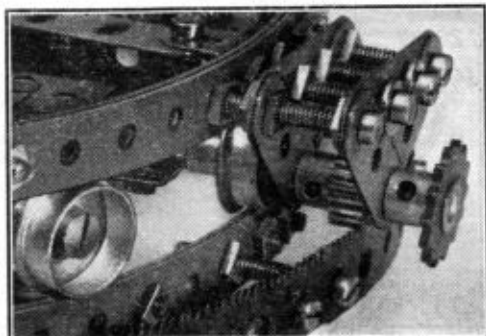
This illustration shows how the geared roller bearing is rotated through a Pinion engaging a ring of Rack Strips.
